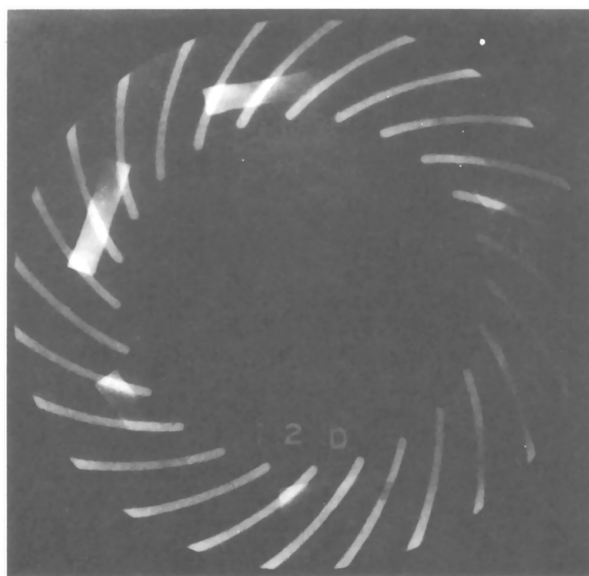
X-ray view of a sound casting shown by uniform color tone and sharp definition of rib structure
